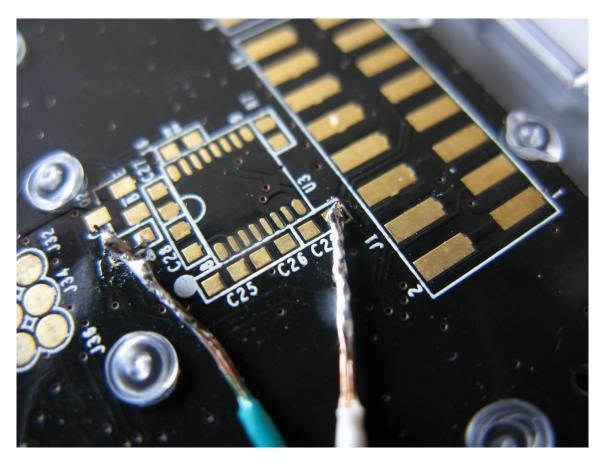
Solder the wire from the longer leg to R18, the other wire to C29, Katie identifies this as the corner pin of U3. I glued the wire with hot glue to the PCB and the lower case before reassembling.
